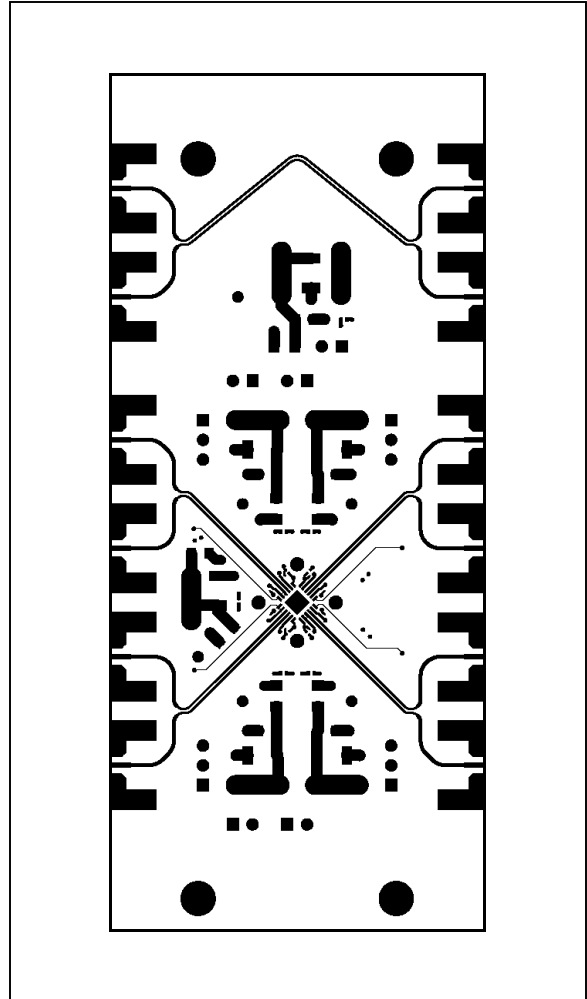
MAX3841 EV Kit PC Board Layout—Component Side
